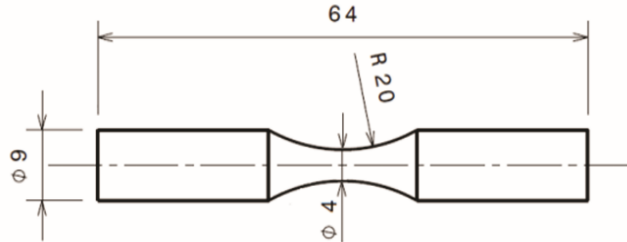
Geometrical details of the fatigue test sample (dimensions are in mm).
